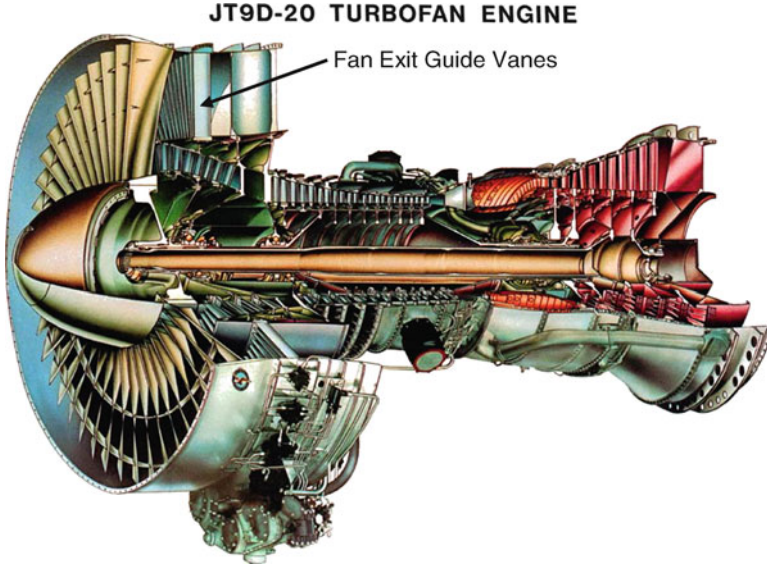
A cutaway section of the Pratt & Whitney JT9D turbofan engine
